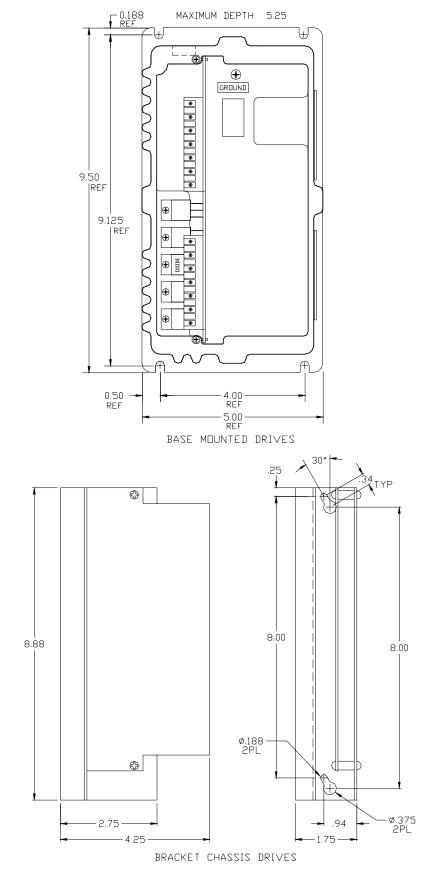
CONTROLLER MOUNTING DIMENSIONS
